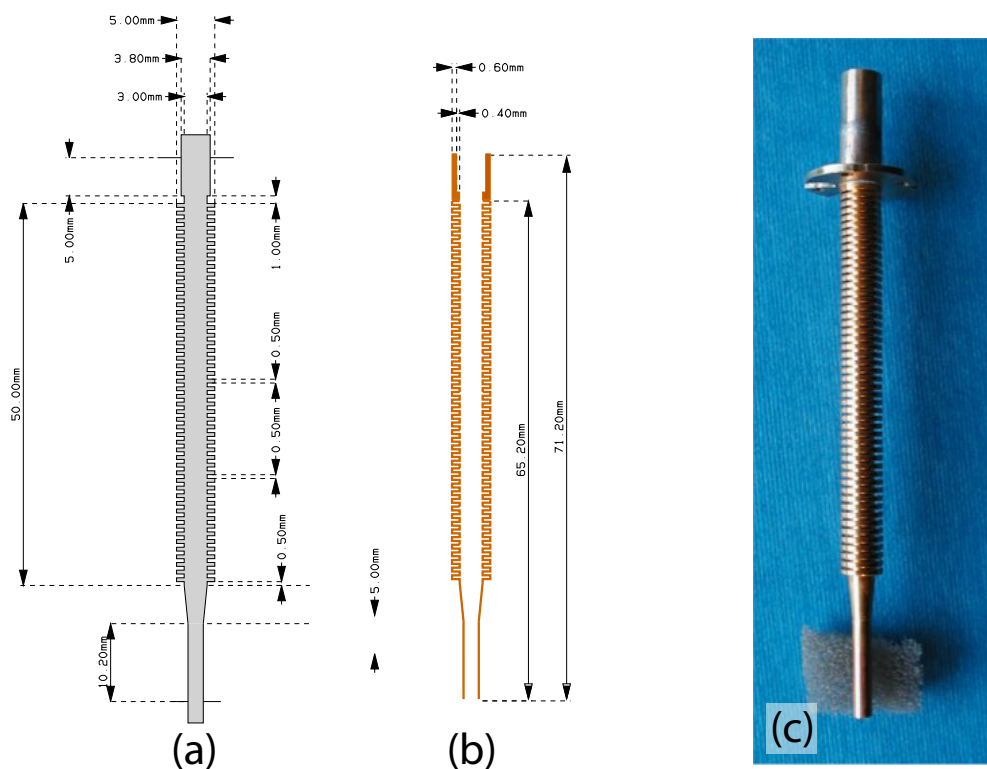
The flexible waveguide to pass through the SXM scan tube. (a) The aluminium mandrel on which the guide is formed. (b) The guide itself. (c) The actual electroform, with nickel silver collar and top flange attached.
